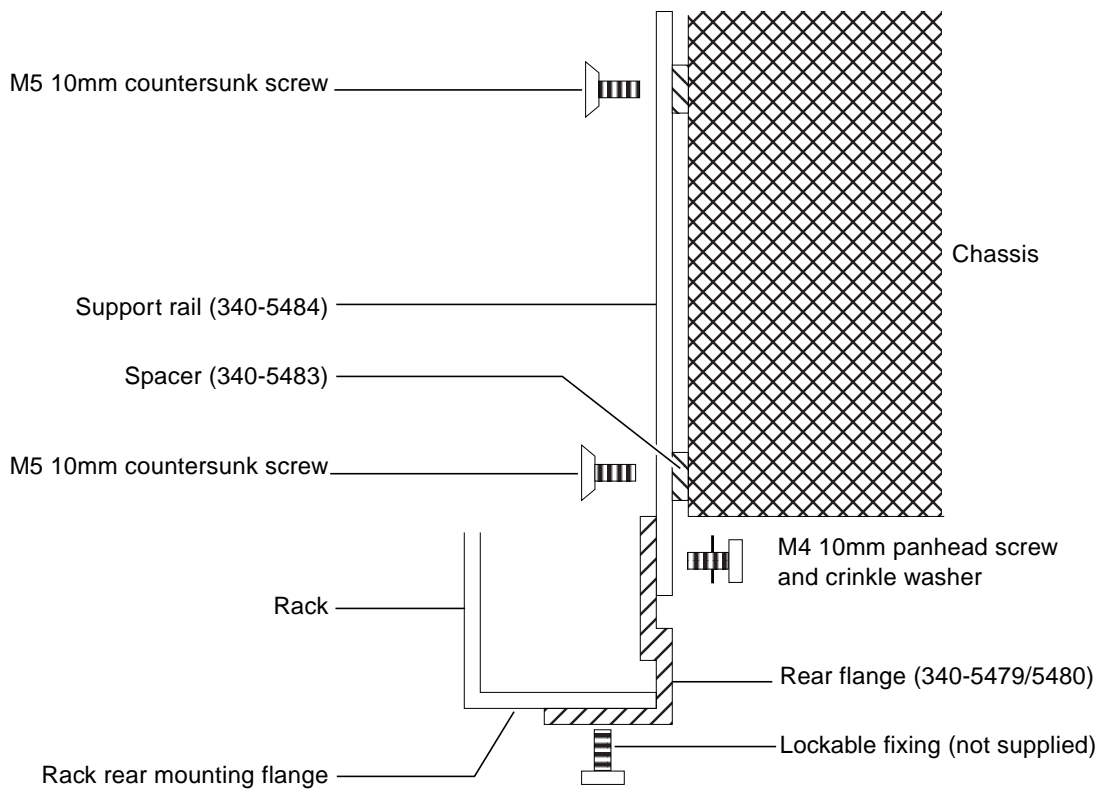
Rear Rack Mounting (19-inch Rack)
